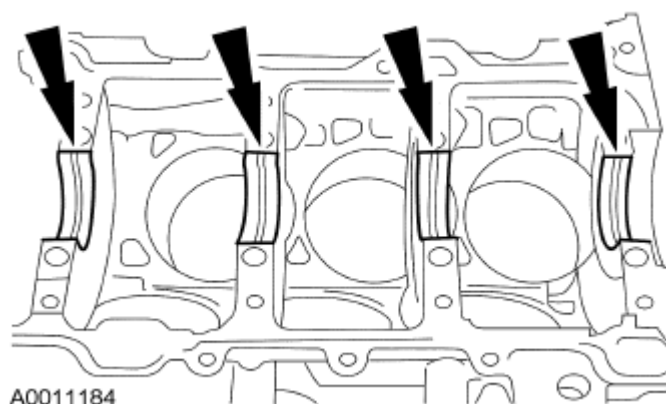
Locating Crankshaft Main Bearings Installation Position
